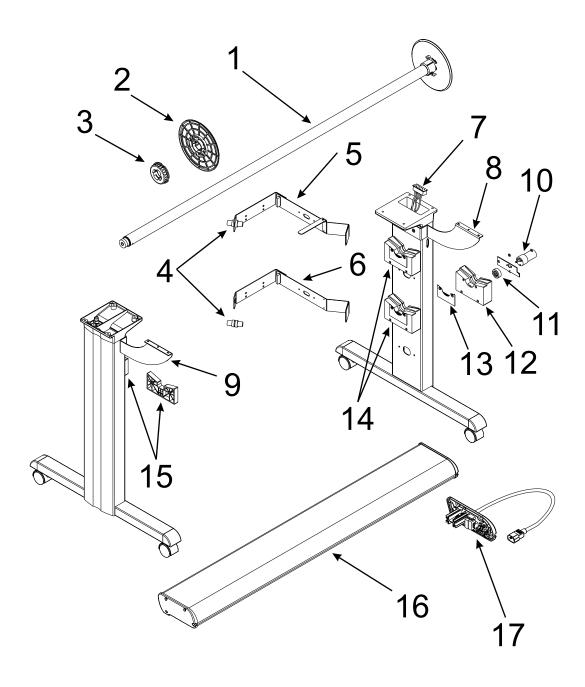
Power Feed and Take-Up Parts Breakdown.
